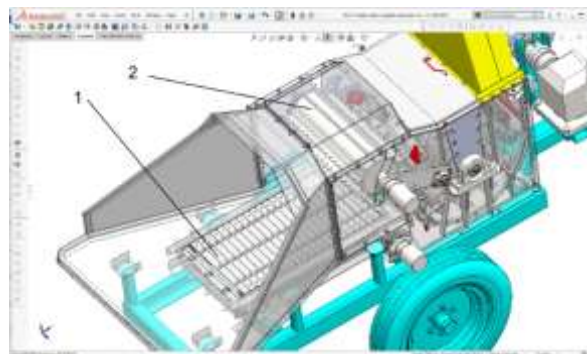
Scraper conveyor (1) and feed rotor (2)
